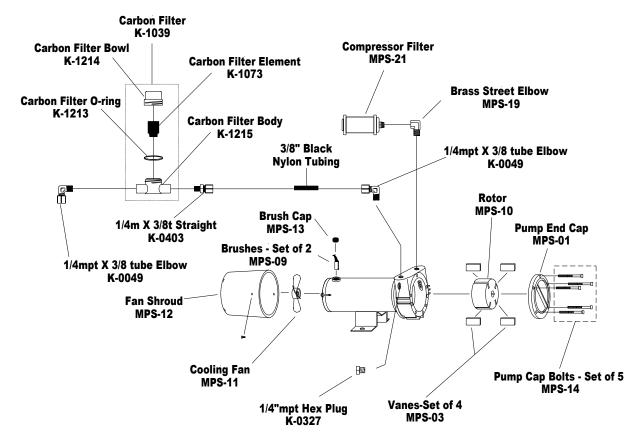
Borg Rotary Vane Compressor Model RV12
